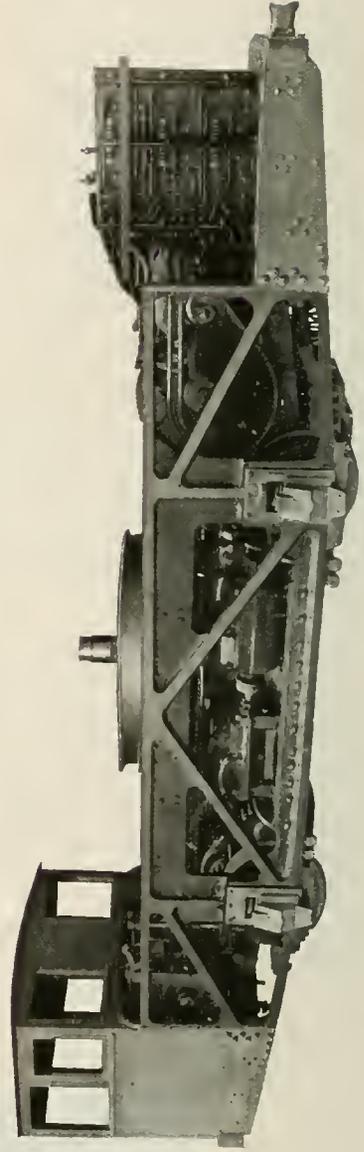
A Side View of a Towing Locomotive with Covers and One Cab Removed Showing the Back of a Control Panel
